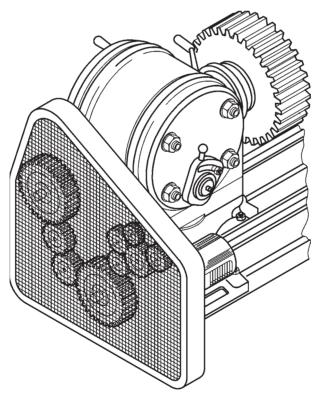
Example of an enclosing guard totally preventing access to transmission machinery
